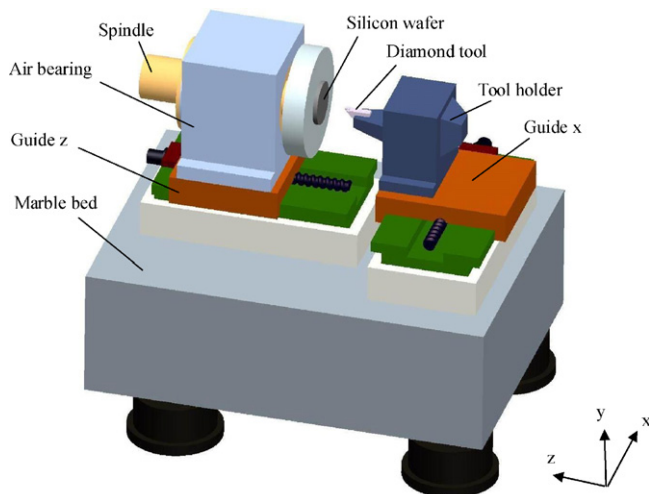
Schematic illustration of the ultra-precision machine tool.
